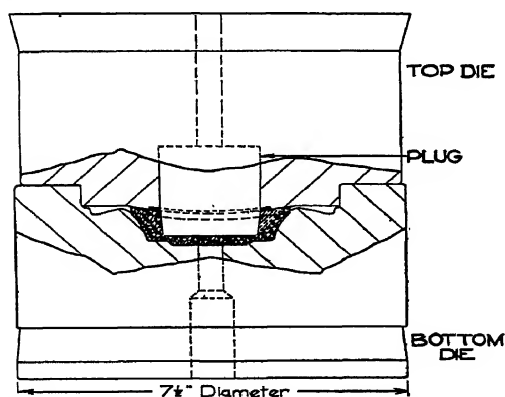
TWO-PIECE DIE WITH PLUG FOR FORMING EVERDUR SPUD SHOWN IN FIG. 9.
